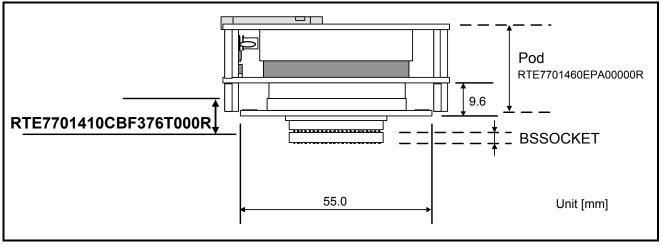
Drawing of the Socket Assembly (for RTE7701460EPA00000R)
